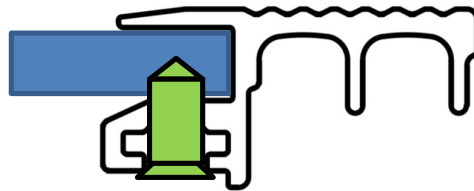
insert the self-drilling screw ST3.5 x 13 or thread forming screws M4x10
